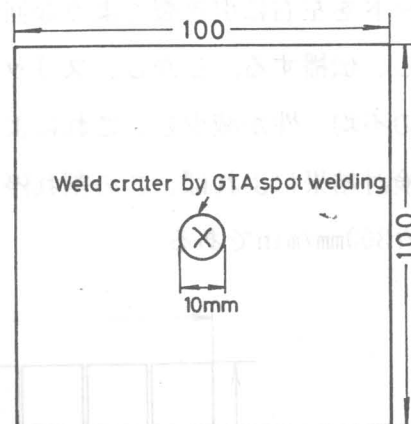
Shape and dimension of GTAW crater cracking test specimen.
